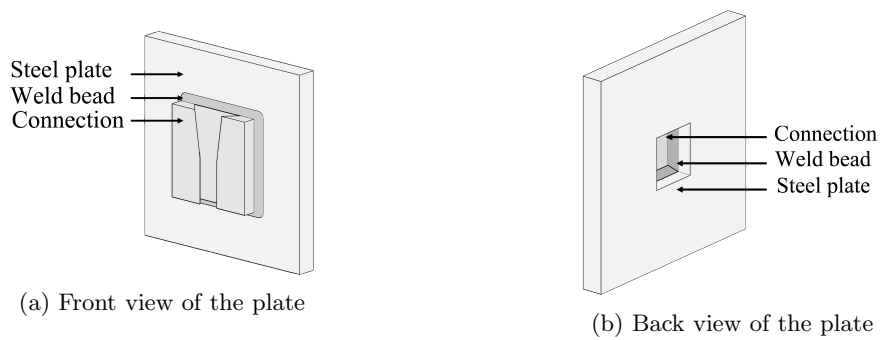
Weld connection between the *Snap-Fit connection* and the plate
